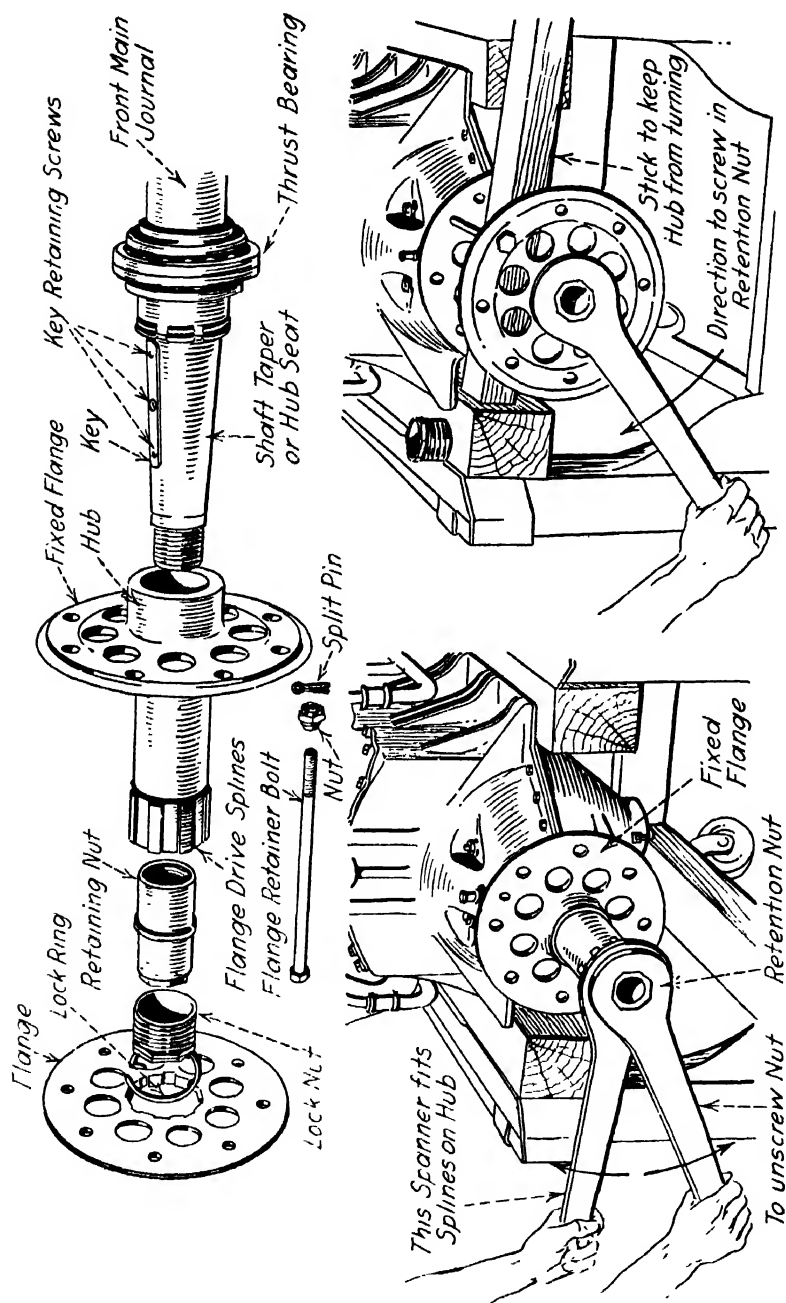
How Propeller Hub is Mounted on Crankshaft of Liberty and Similar Engines.
